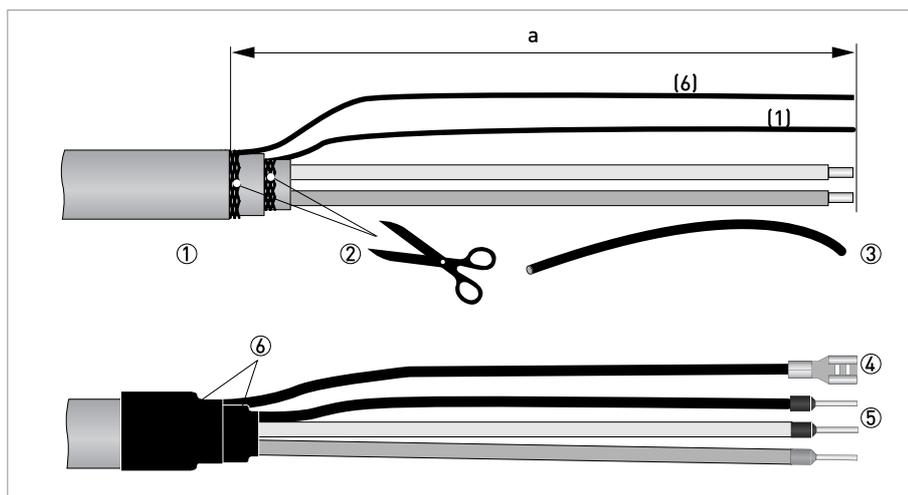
Signal cable A, preparation for wall-mounted housing
